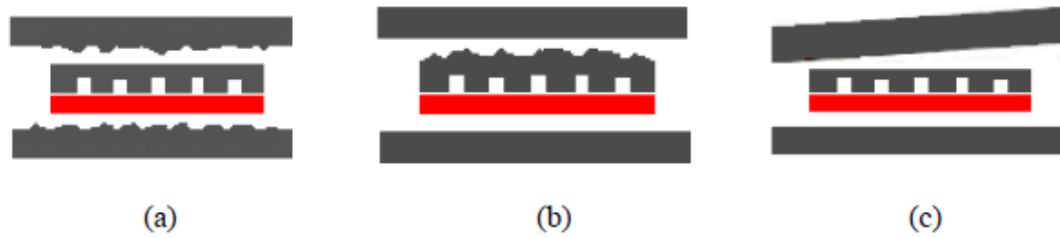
Schematics of possible issues affecting the parallelism of the hot plates: (a) imperfect plate surface; (b) uneven mould backside; (c) non-parallel plates.
